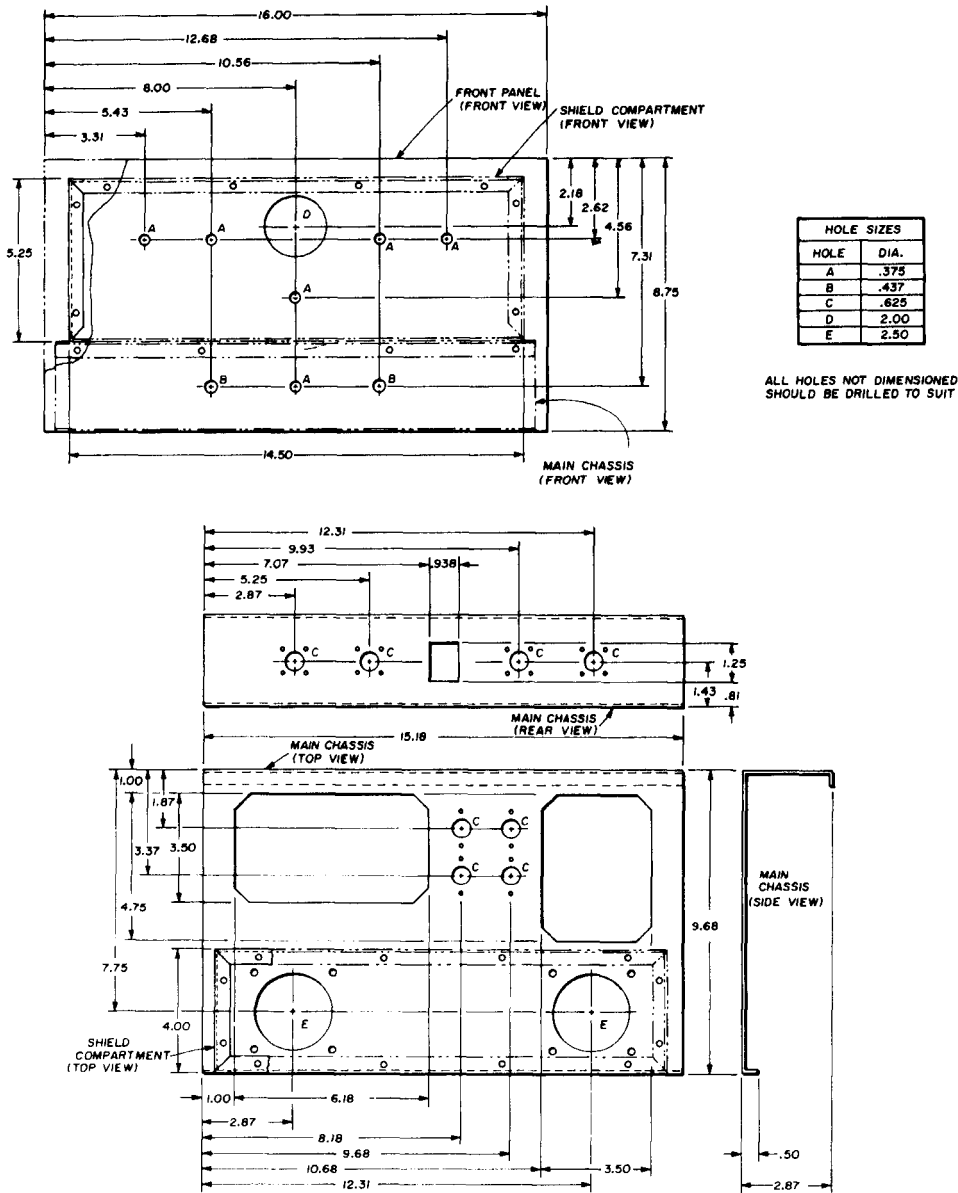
Mechanical construction details of the 6- and 2-meter transmitter chassis.
